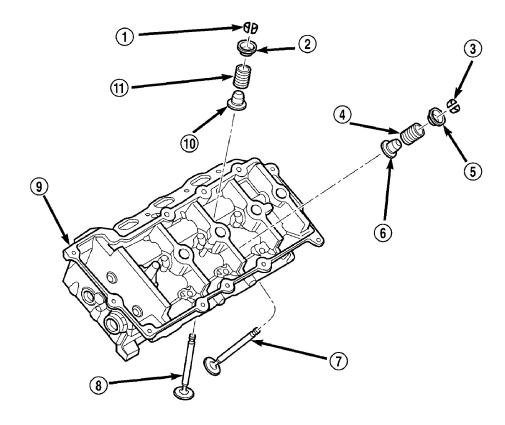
Identifying Cylinder Head Components Courtesy of CHRYSLER LLC
